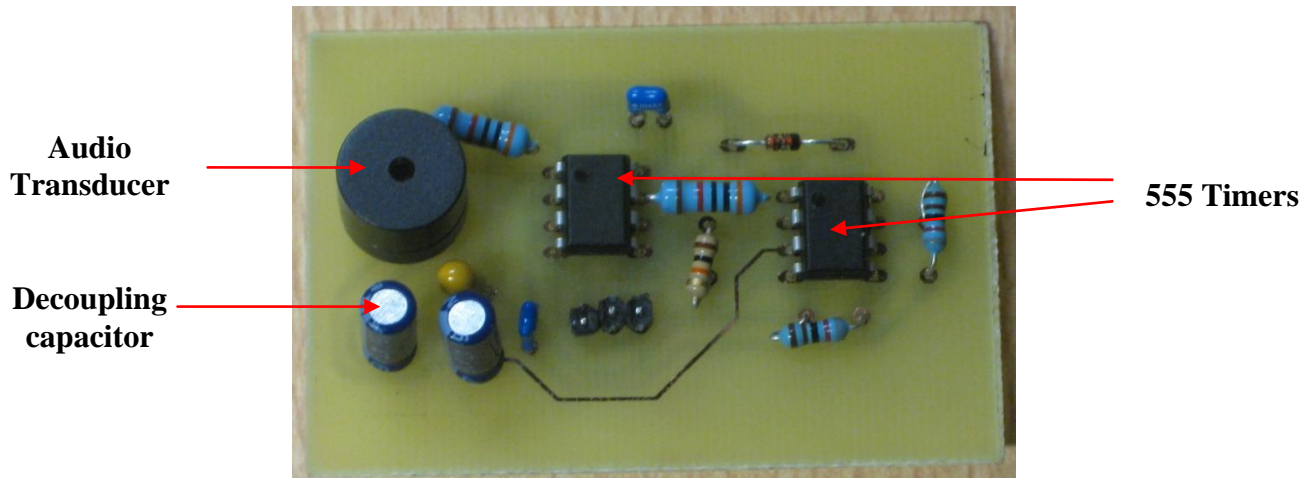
Assembled printed circuit board for the audio siren alert circuit
